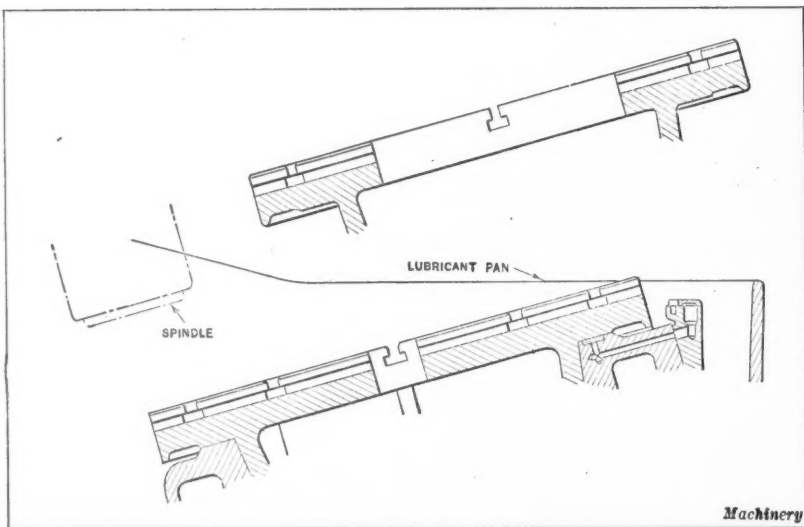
Two Types of Table supplied on a Milling Machine of the Tilted Rotary Type
